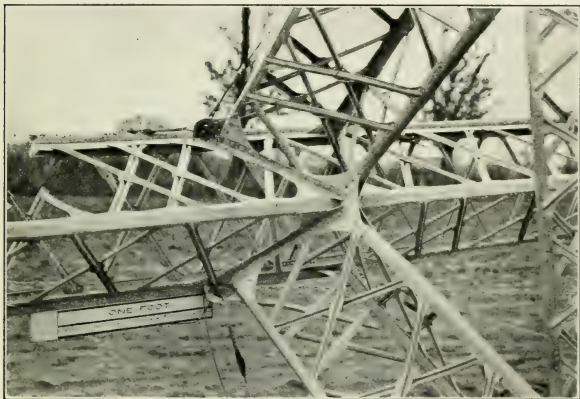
Typical Hull Girders Showing an Intersection. Photograph from *L-33* Brought Down in England, 1916. (Navy Dept. Photo.)
